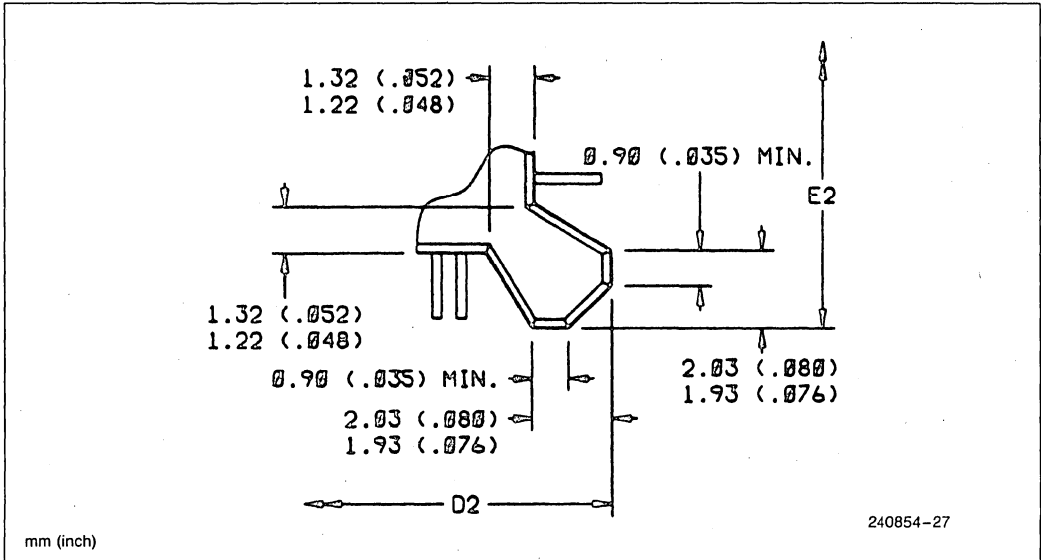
132-Lead PQFP Mechanical Package Detail—Protective Bumper
